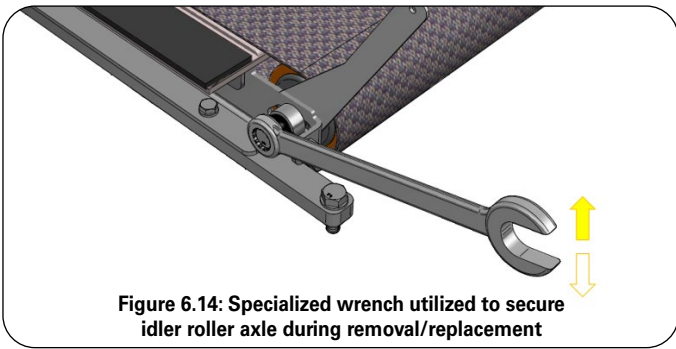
Specialized wrench utilized to secure idler roller axle during removal/replacement
